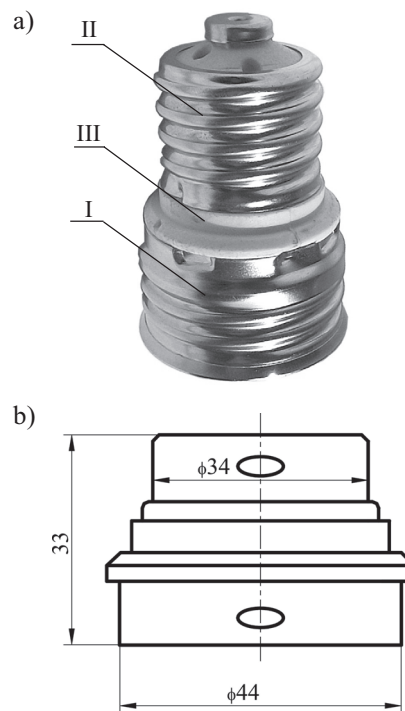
Incandescent lamp unit: a) assembled unit; b) porcelain fitting
